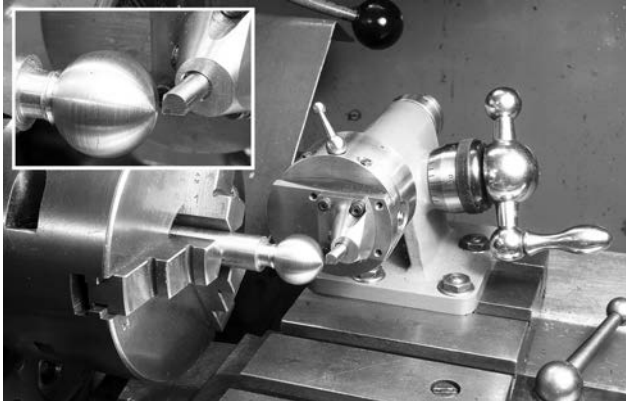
Making a two-ball handle, this one being the ball handle used for the spherical attachment itself as shown on drawing Sheet 8
